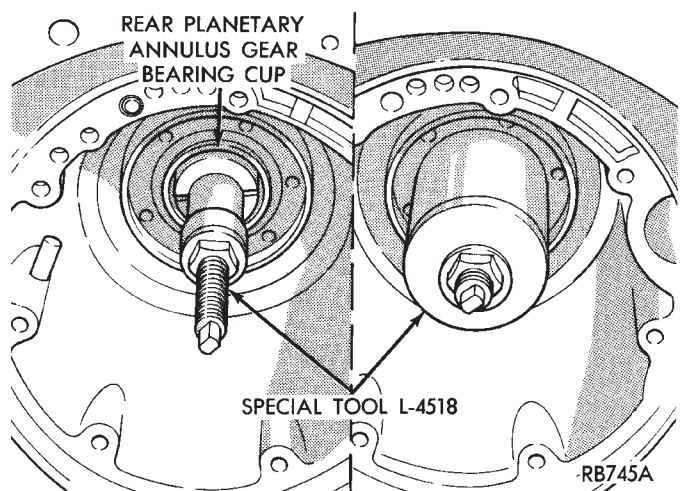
Remove Rear Planetary Annulus Gear Bearing Cone
